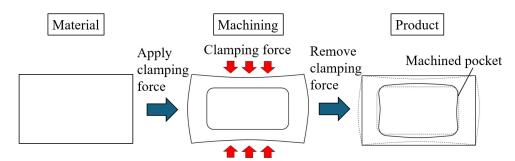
Machining error due to deformation of workpiece caused by clamping in the vice.
